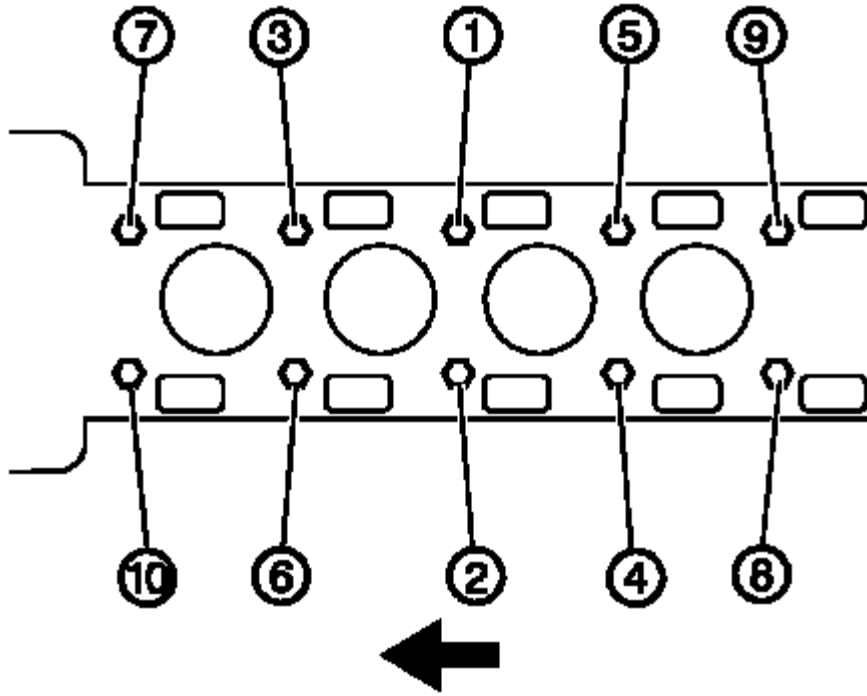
Identifying Cylinder Head Bolt Tightening Sequence
